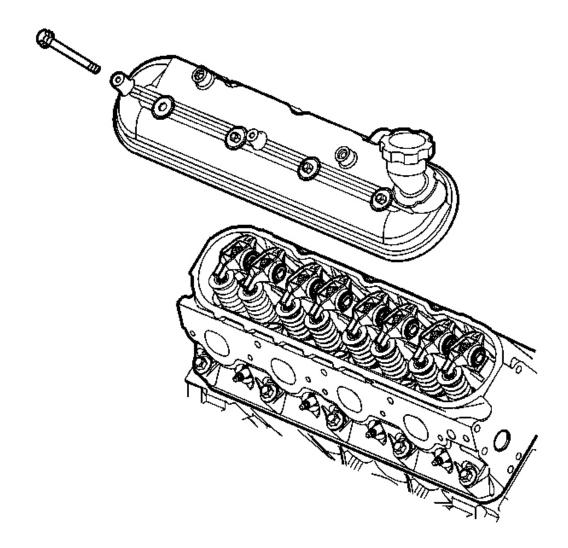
View Of Valve Rocker Arm Cover & Bolts (Right) Courtesy of GENERAL MOTORS CORP.
